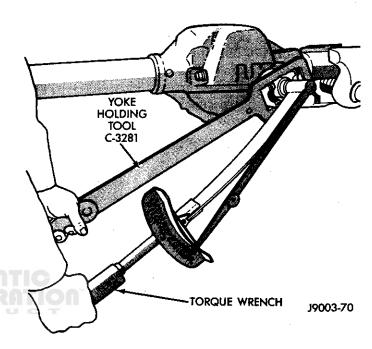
Tightening Drive Pinion Gear Shaft Nut
